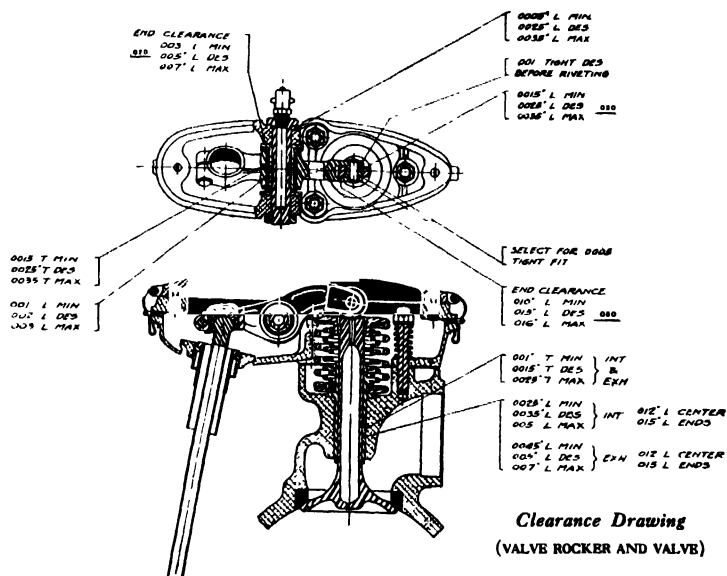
Clearance Drawing of Wright "Cyclone" Engine Valve Rocker and Valve.
